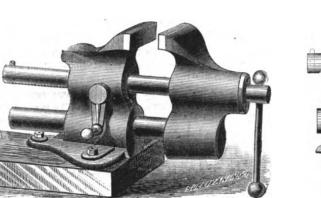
Thomson's Quick Adjusting Parallel Vise.
